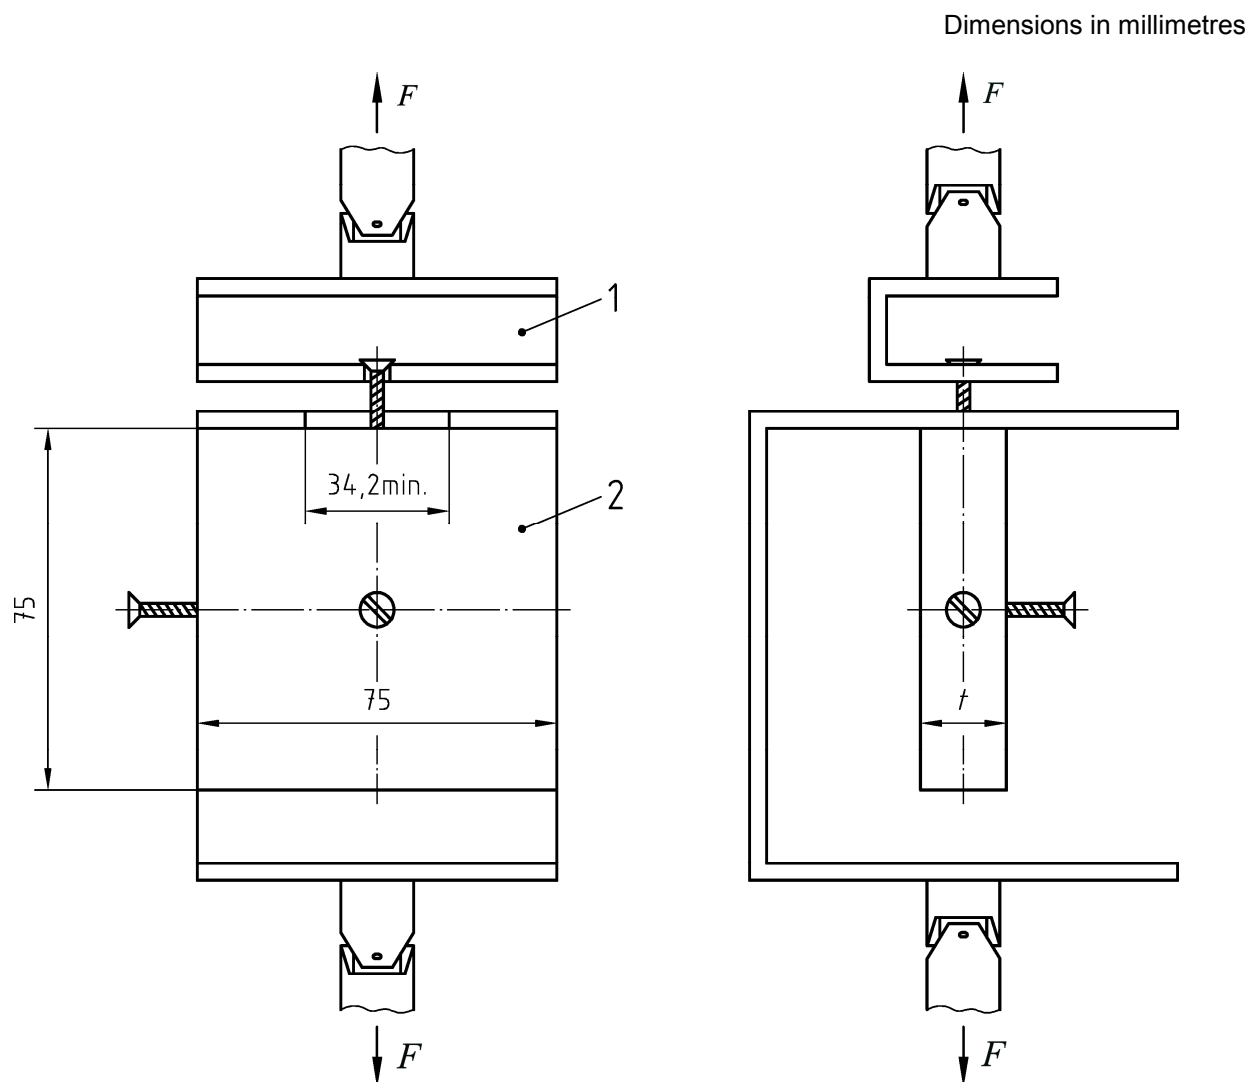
Screw withdrawal test on boards of  $\geq 15$  mm thickness (example)
